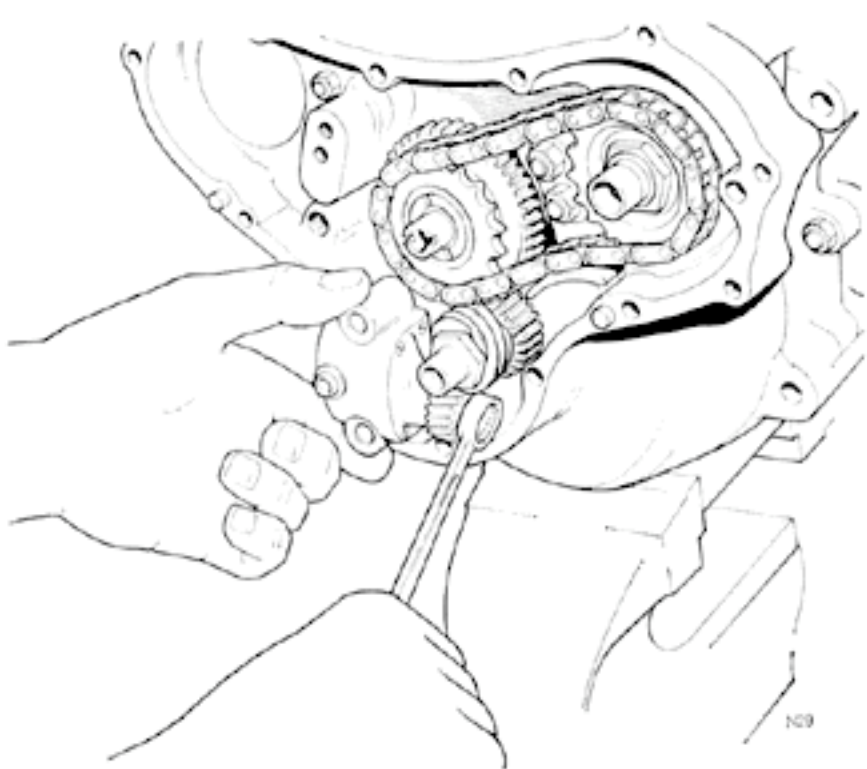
Removing contact breaker cam using service tool 060934
